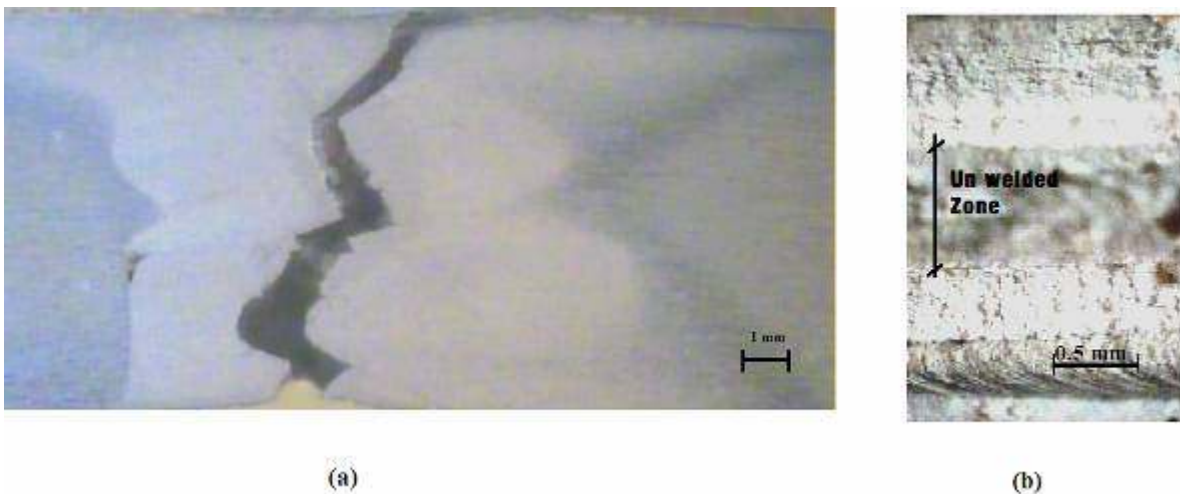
(a)Failure of 0.5 mm pin gap specimens .(b) Intermediate un-welded zone
